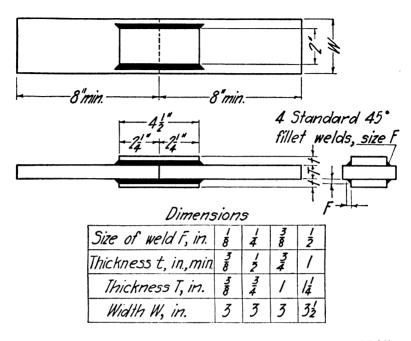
Longitudinal Fillet Weld Shearing Specimen after Welding an necessary specimen dimensions are indicated
